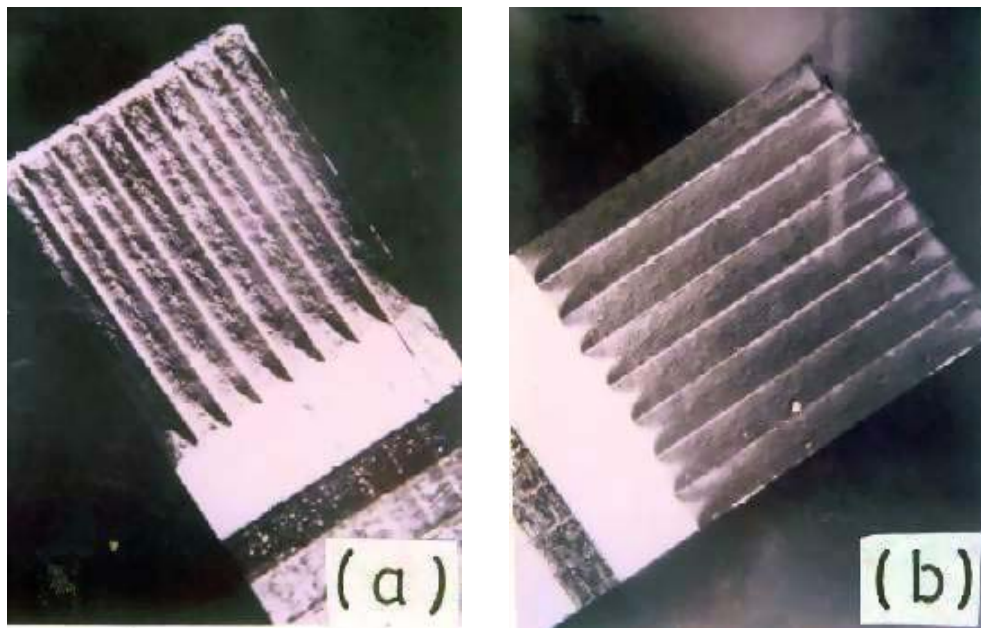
General view of fracture surface typical of (a) patented and cold worked laminates and (b) hardened and tempered laminates where each elements fails by slant fracture at approximately 45° to the tension axis.
